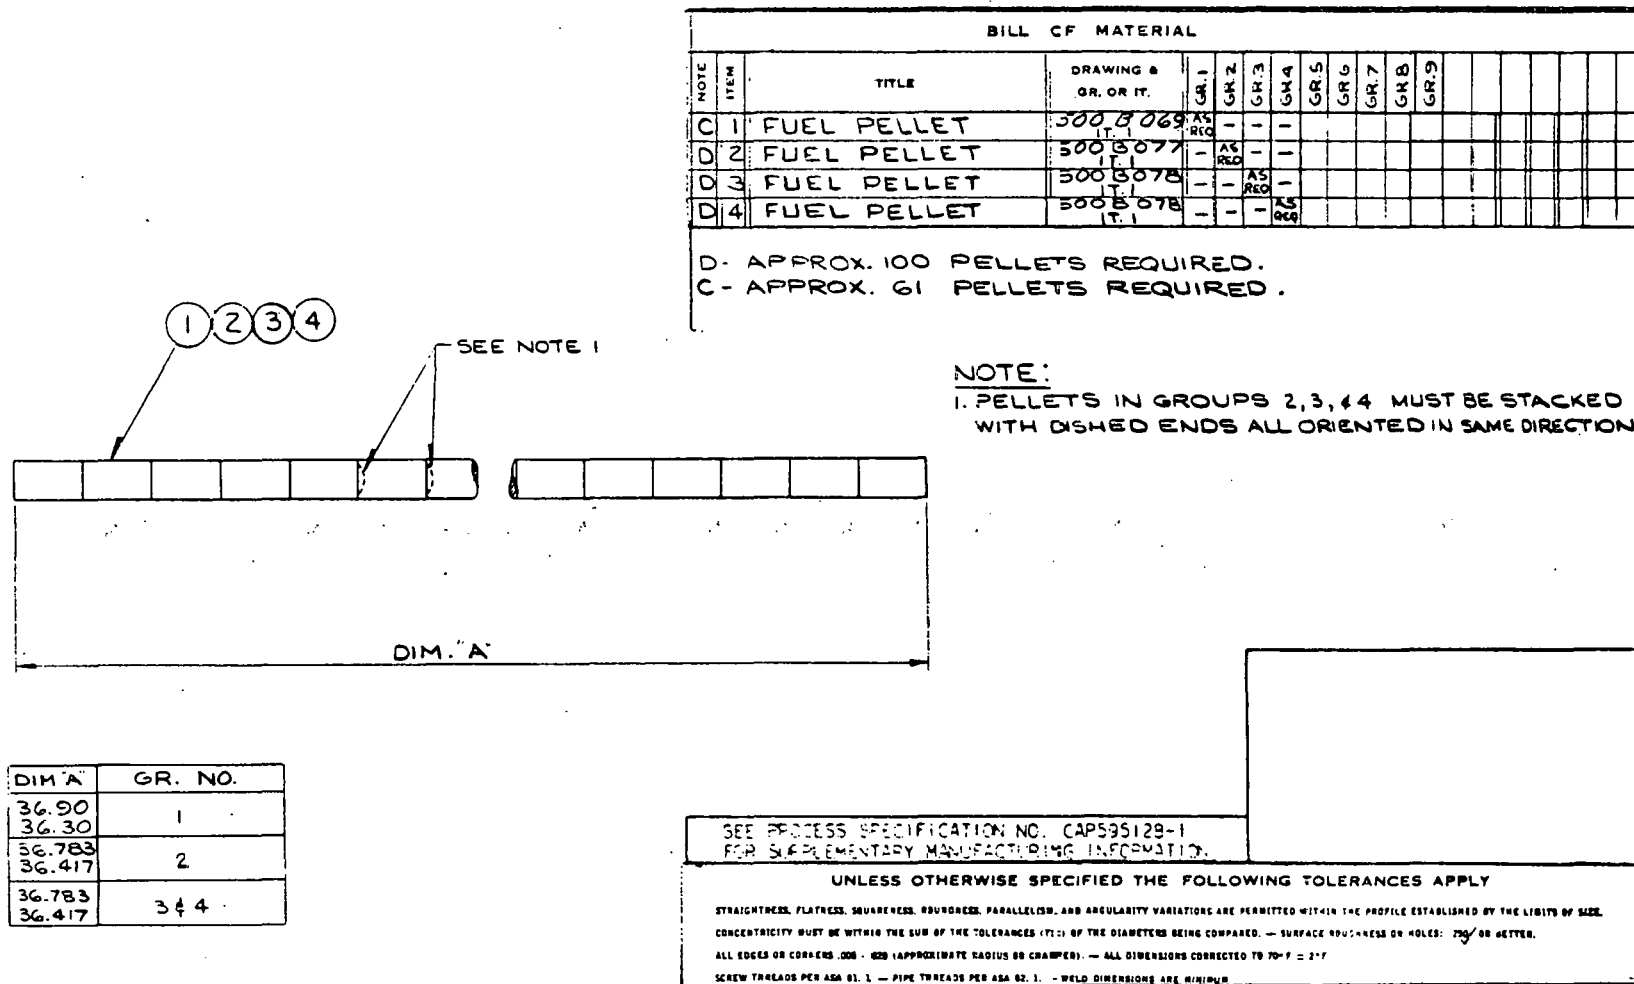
D - Saxton Plutonium Pellet Stack Drawing
